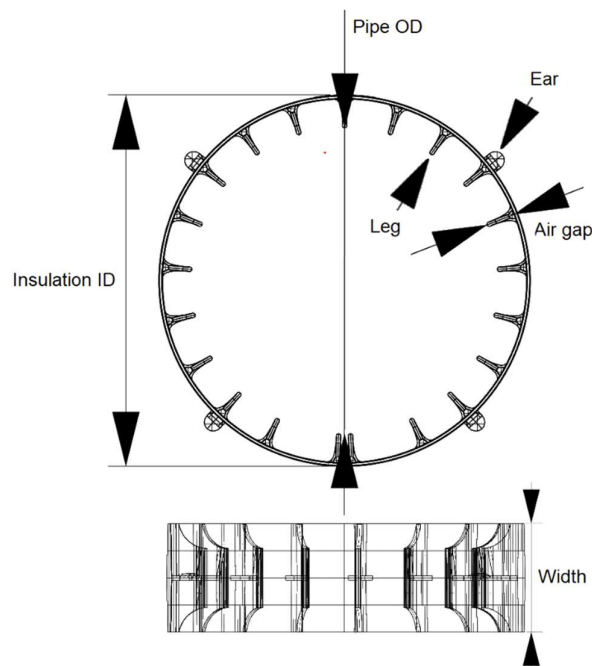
Dimensions and component naming for ESSGE NCS Spacer Ring HT/LT
